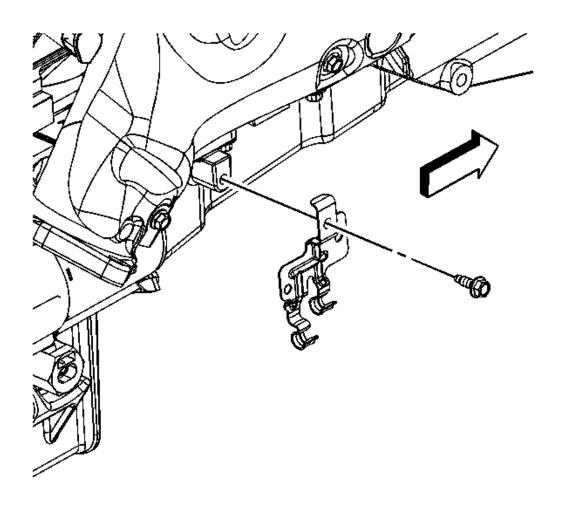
View Of Oil Cooler Line Clip & Bolt Courtesy of GENERAL MOTORS CORP.
